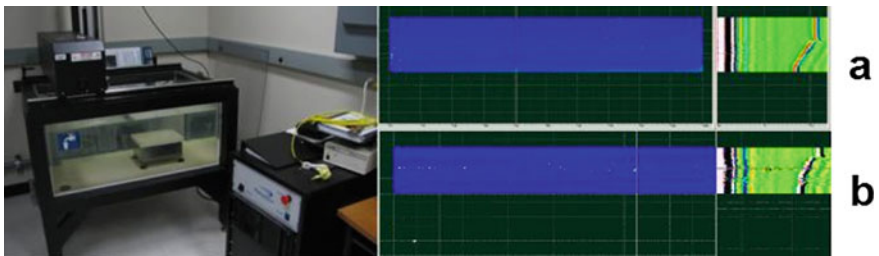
Non-destructive evaluation of friction stir tailer welds using immersed bath ultrasounds with a 30 MHz focalized probe, a sound weld, b weld showing sporadic volumetric defects in center
